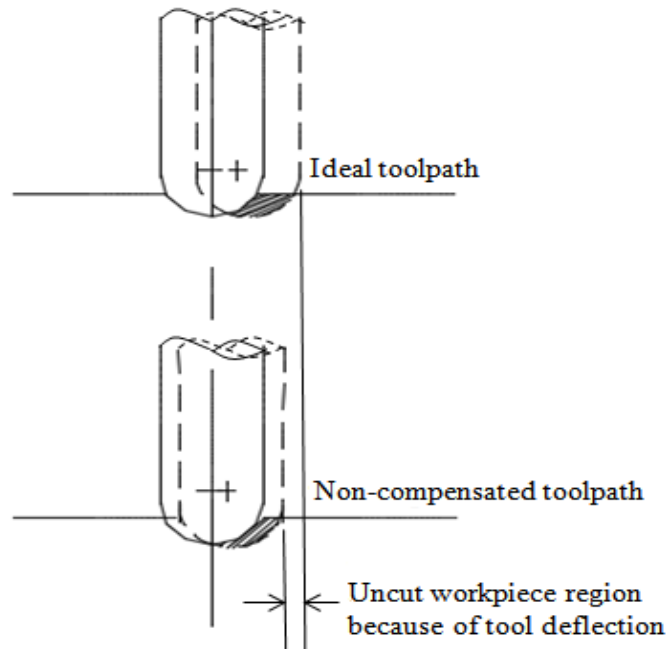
Illustration of uncut workpiece region because of tool deflection
